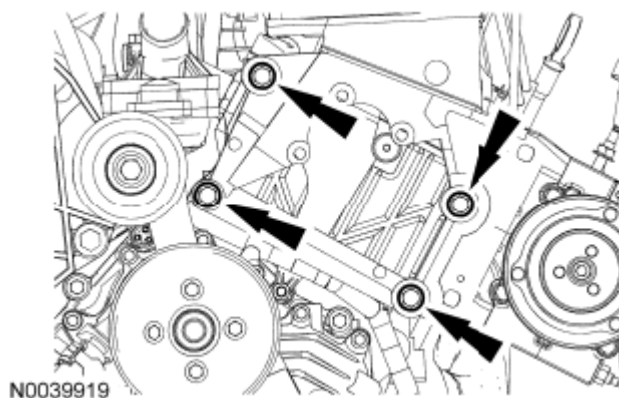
Locating A/C Compressor And Power Steering Pump Bracket With Bolts
